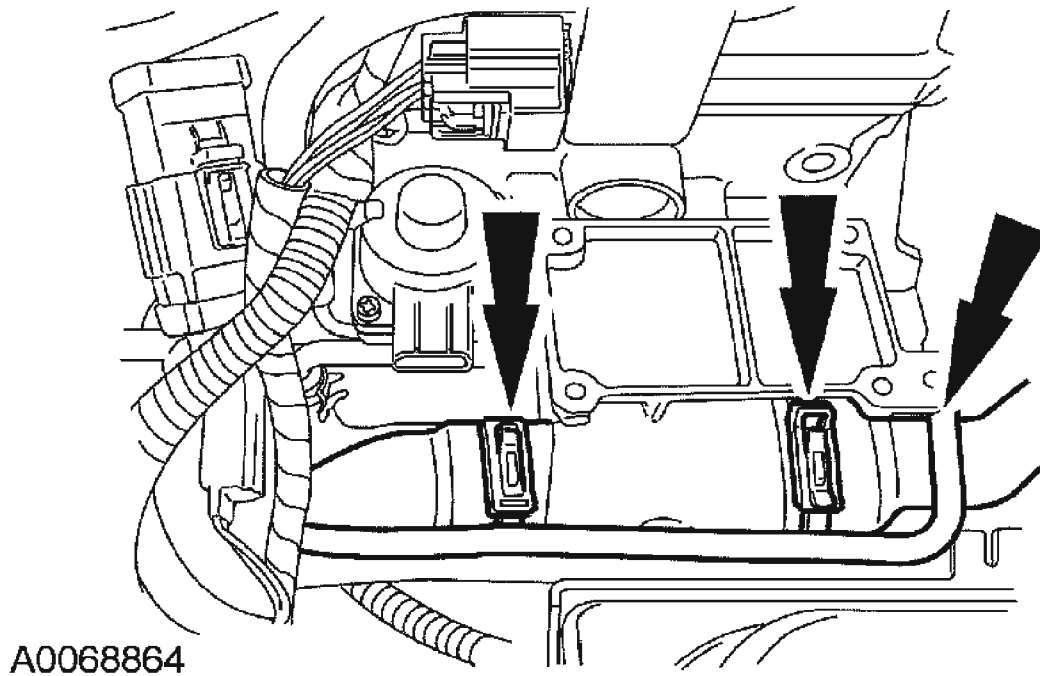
Disconnecting Upper Radiator Hose, Heater Hose And Coolant Vent Hose From Coolant Bypass
